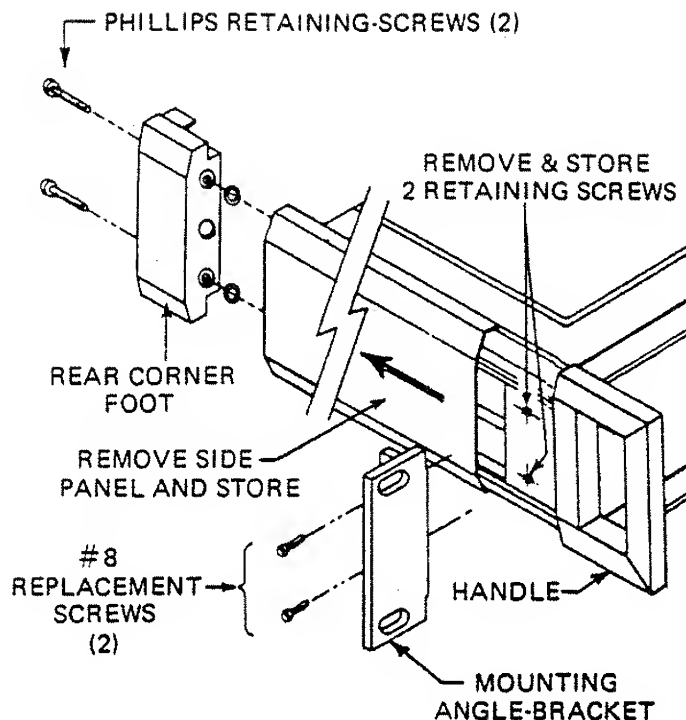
Fixed-Mount Angle-Bracket Detail
